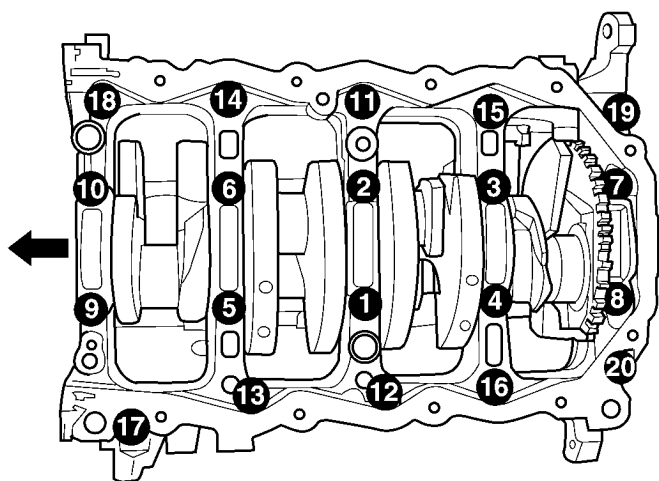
Main Bearing Caps/Bed Plate Bolt Removal Sequence
